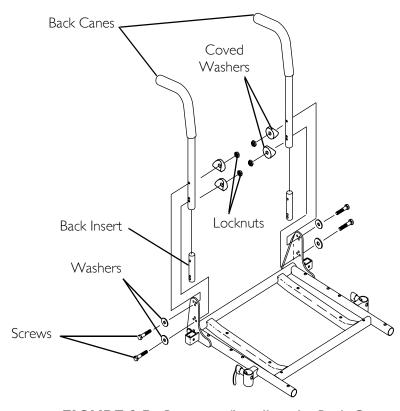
Removing/Installing the Back Canes - ASBA Seats
